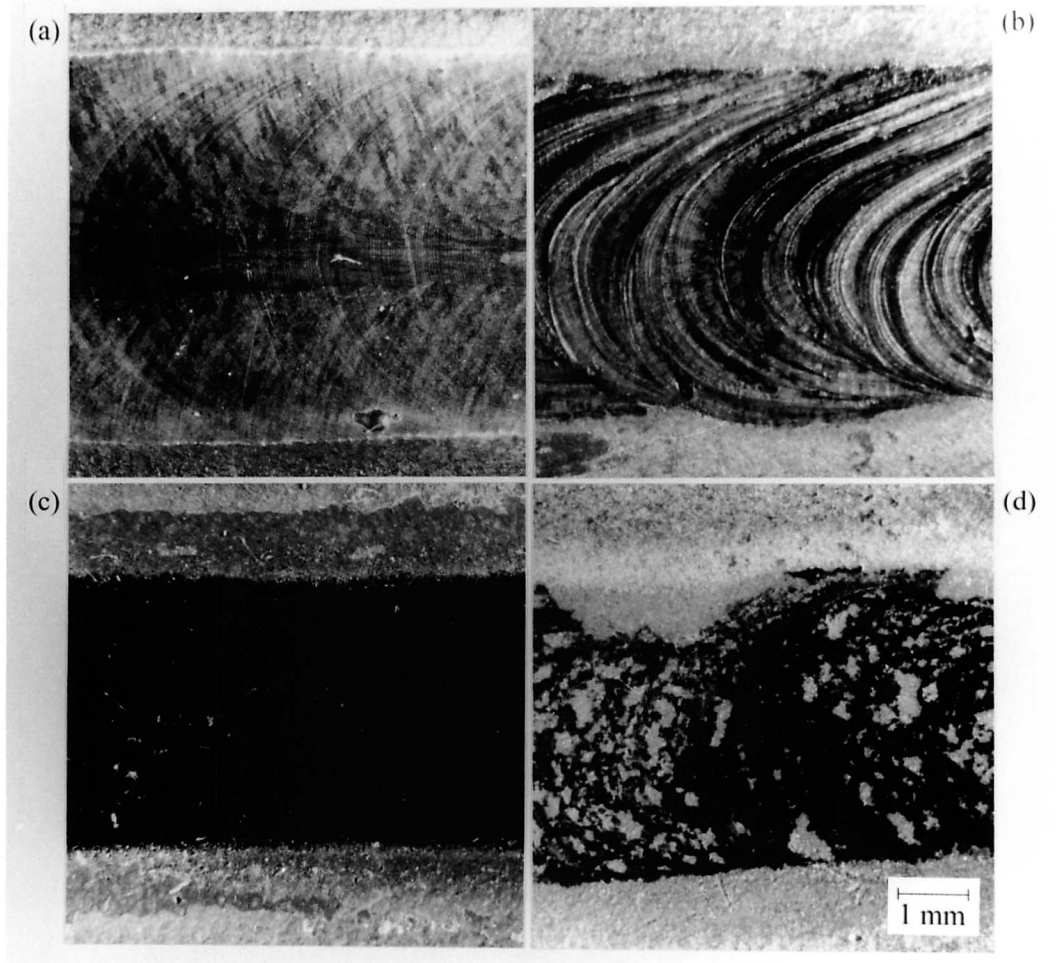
As-welded surfaces of (a-d) S5-S8.
